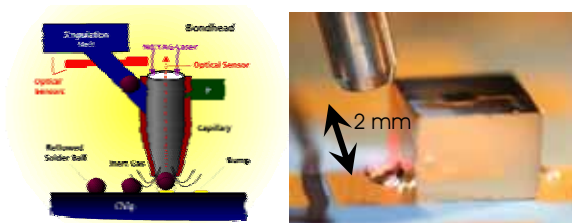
Solder bumping [3] principle (left) and test on a horizontal/ vertical chamfer (right)
